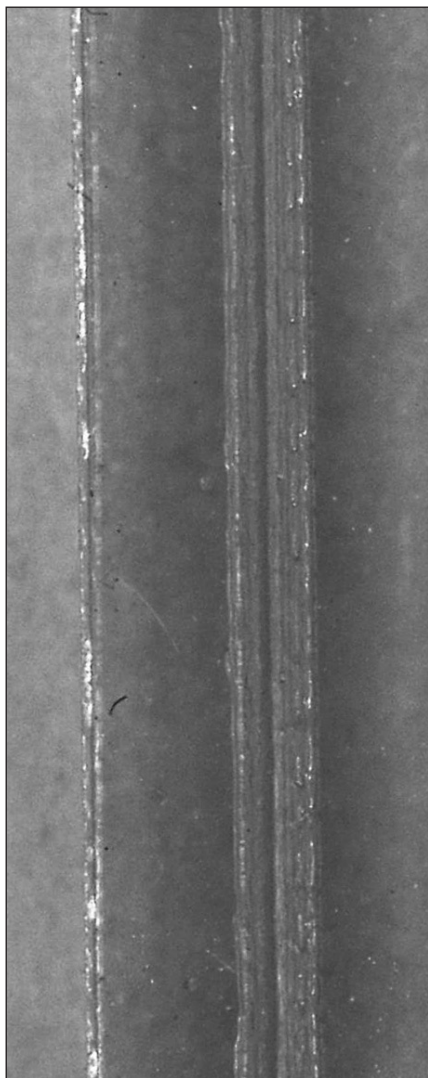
Ultrasonic welding used for sealing long edge of sleeve.
